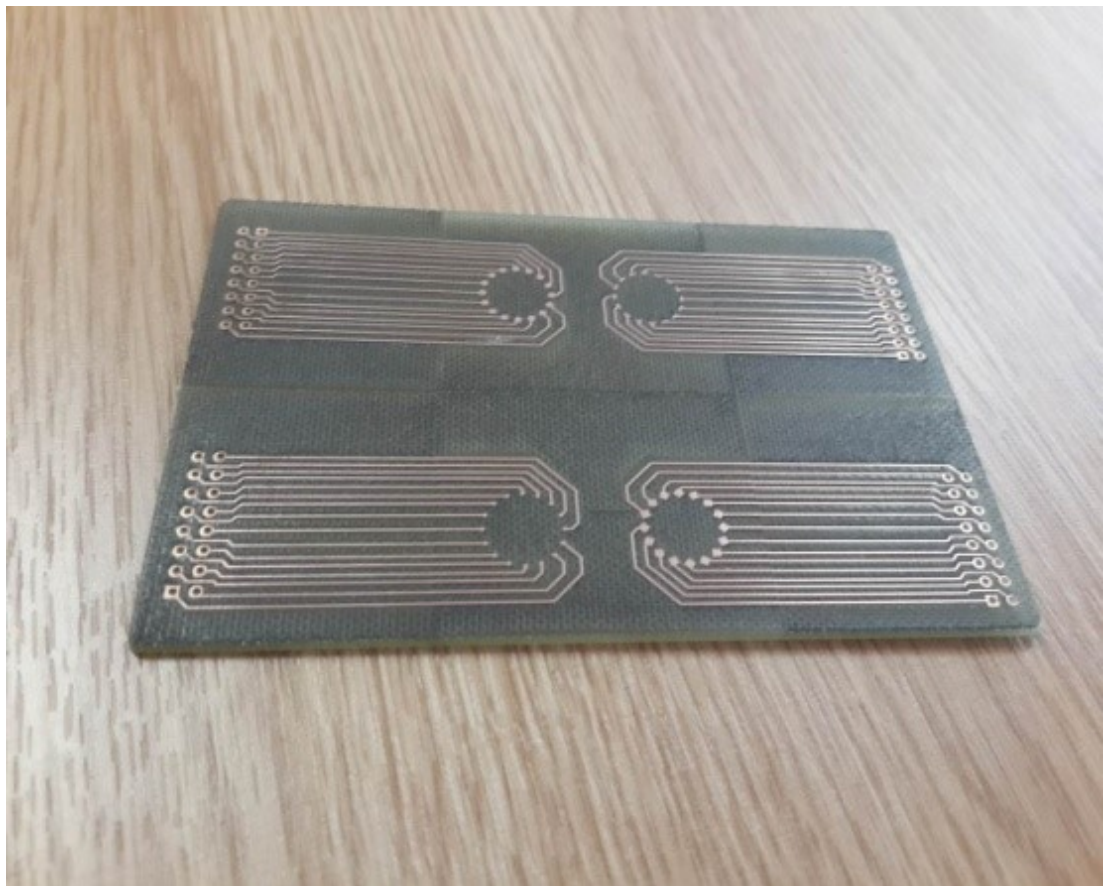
PCB fabricated using the rapid prototyping for EIT measurements
